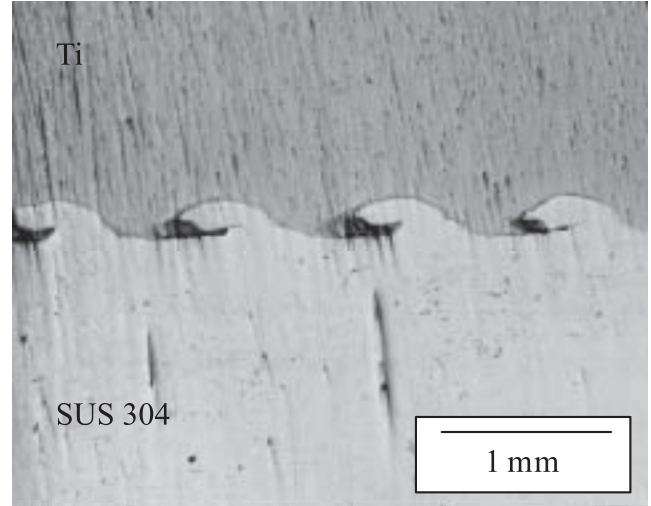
Optical micrograph of titanium/stainless steel welded using conventional explosive welding ($\Delta KE=3.72$ MJ m⁻²).
